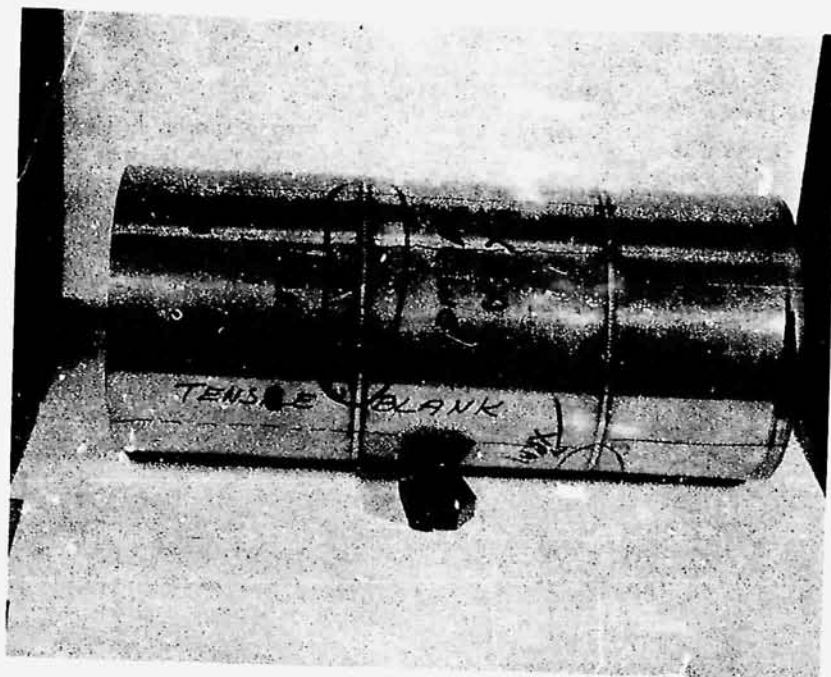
Typical Orbital TIG Weld in Inconel 718 Tube, 0.05-in. Wall and 6-in. Diameter, No Filler Added
